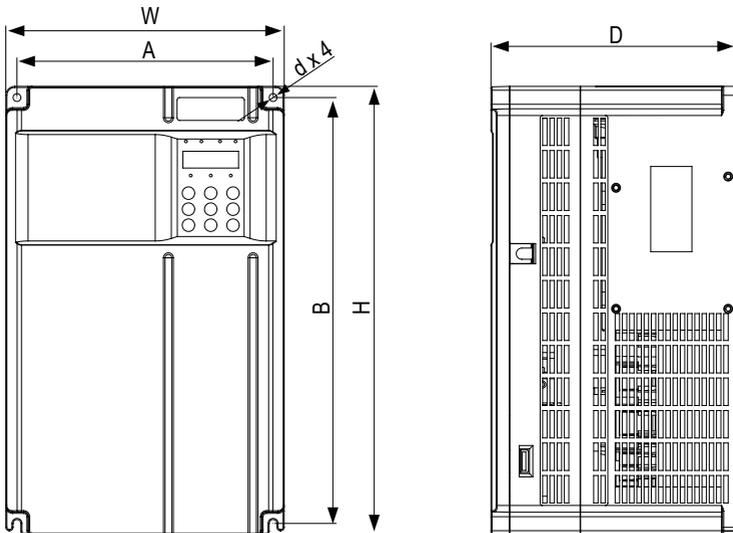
Overall and mounting dimensions of MD290T45G/55P(B) to MD290T160G/200P and MD290-2T22G/30P(B) to MD290-2T55G/75P
